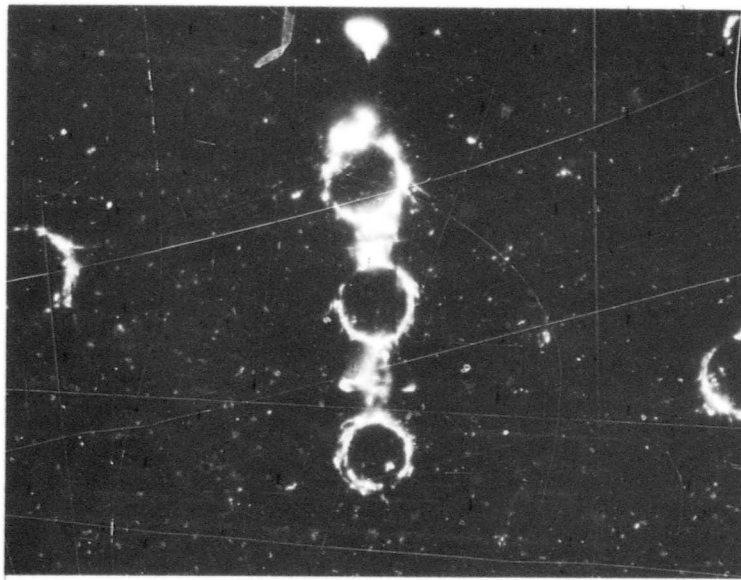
DETAILS OF RING FRACTURES ON SPECIMEN G3
